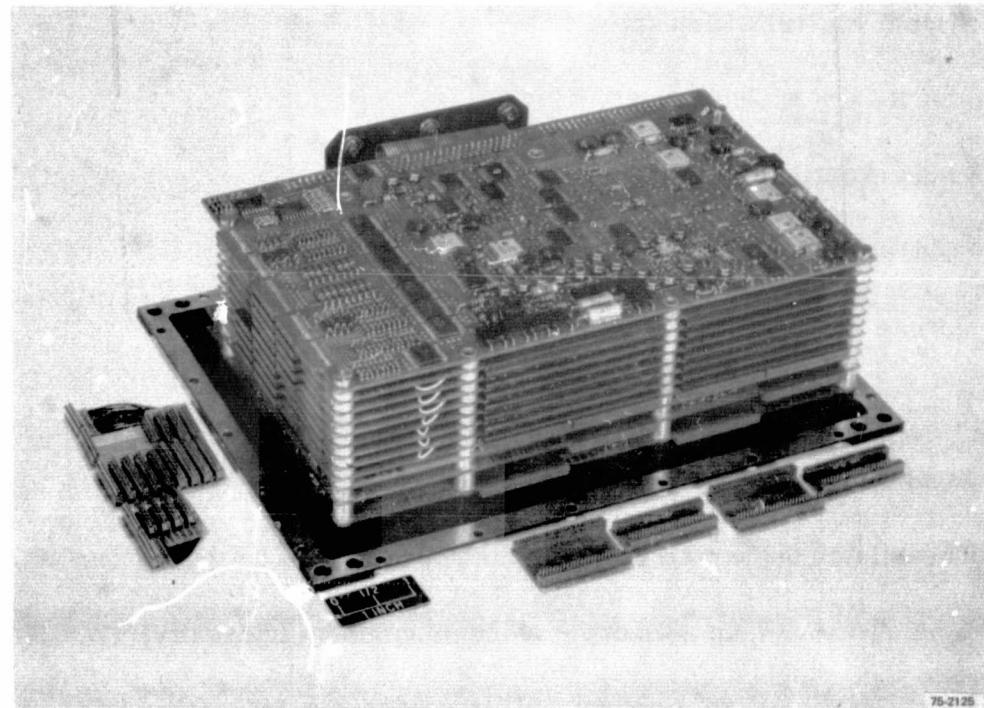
4K x 18 Bit Plated Wire Integral Assembly
